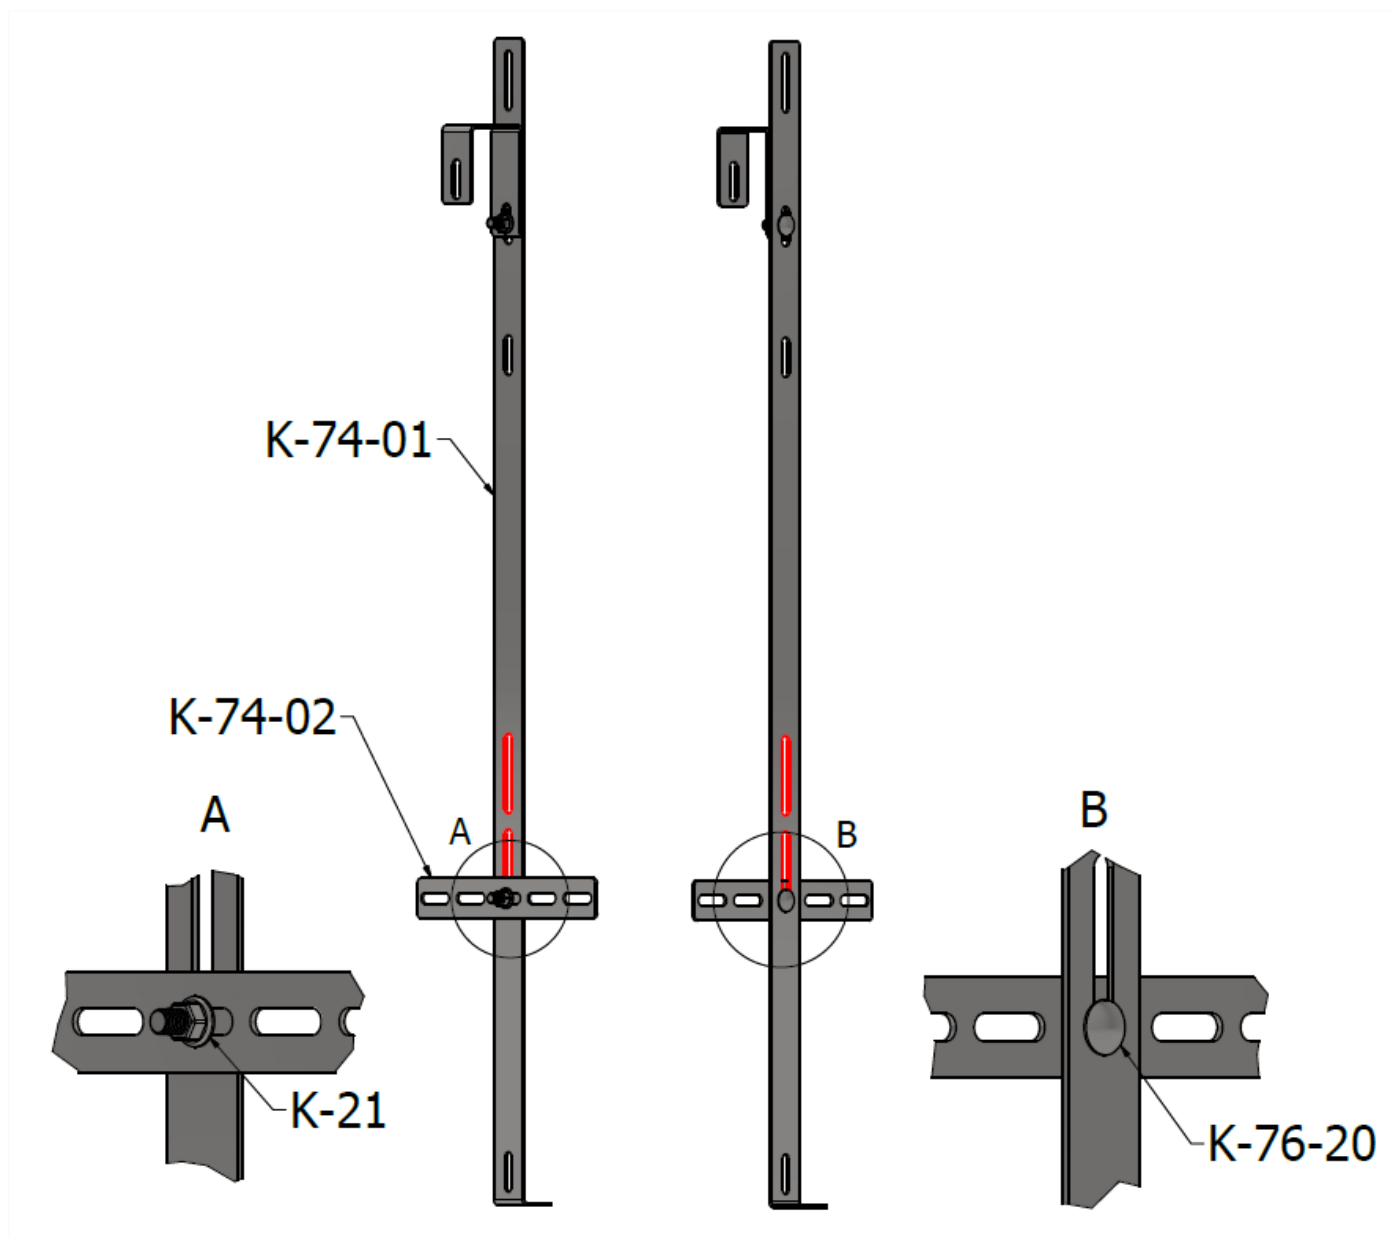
Bolting of flat bar K-74-02 with hook K-71-01
